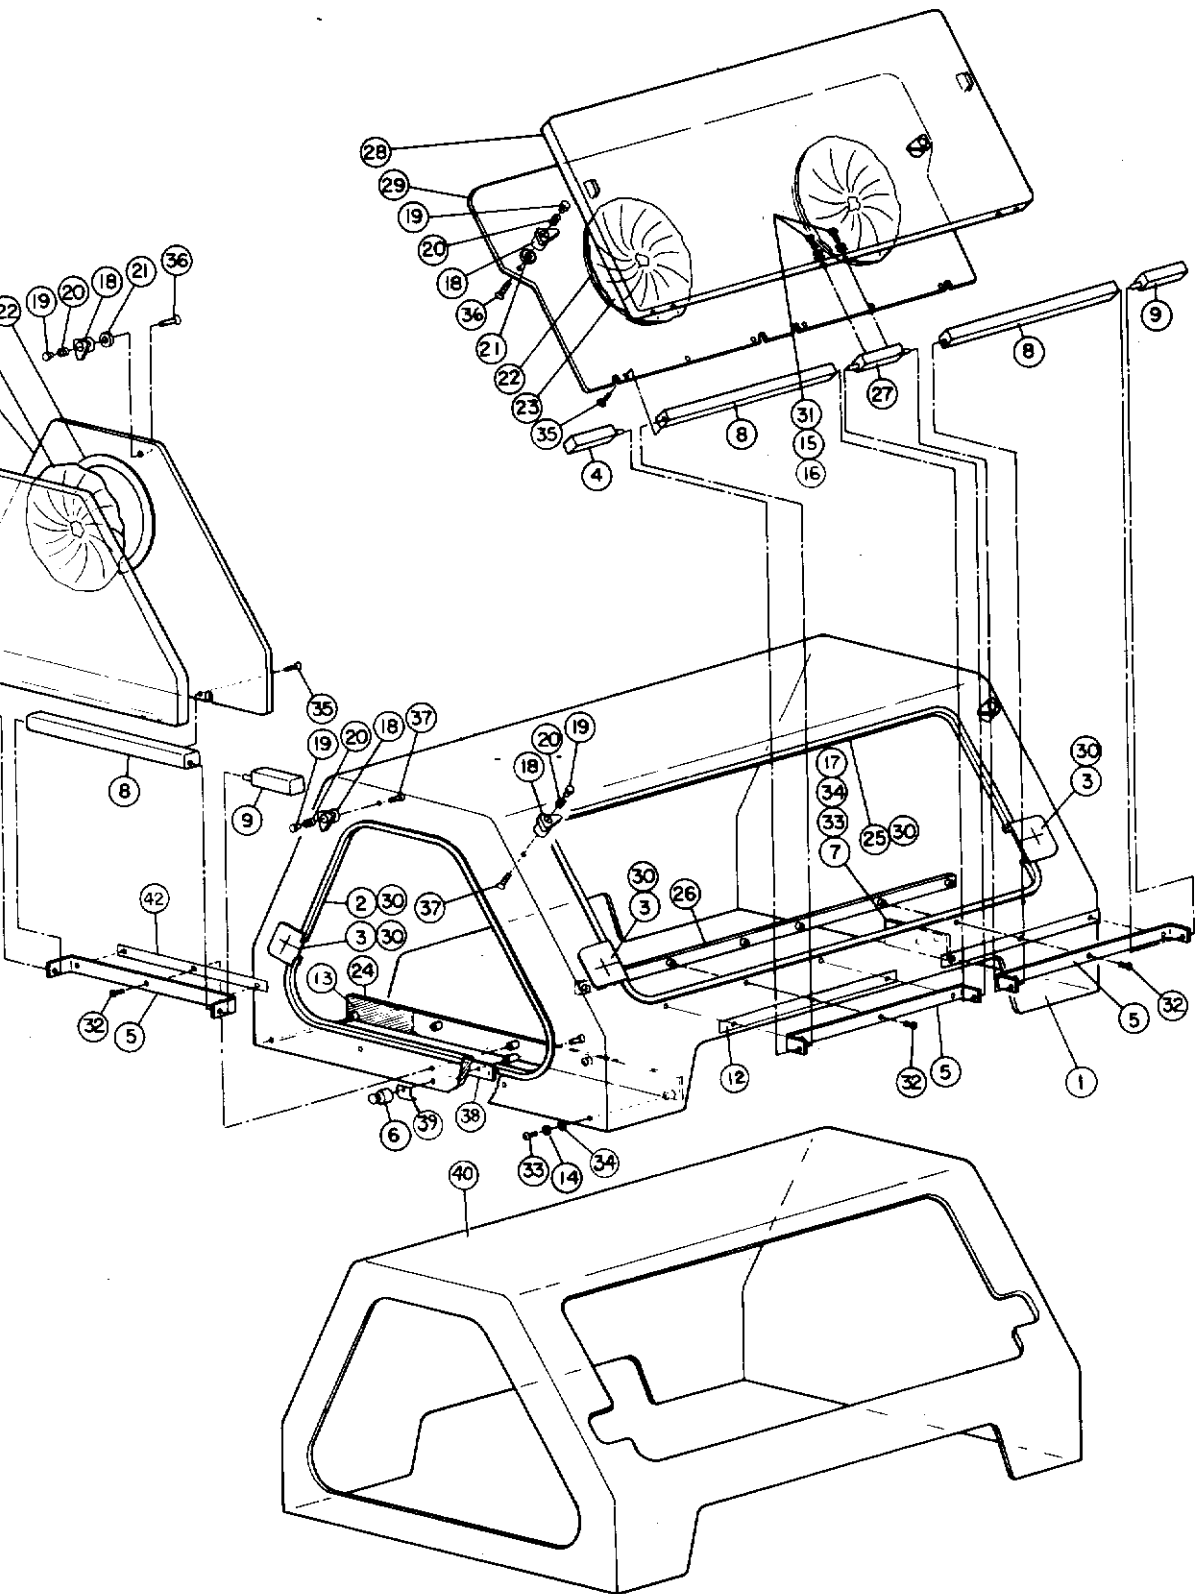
PARTS LOCATION DIAGRAM, HOOD ASSEMBLY
